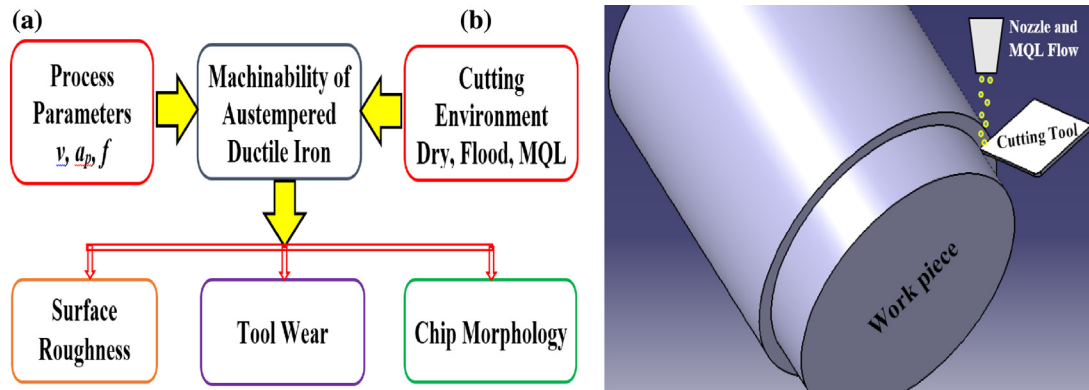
(a) Theme of experimental work and (b) tool-workpiece geometry.
